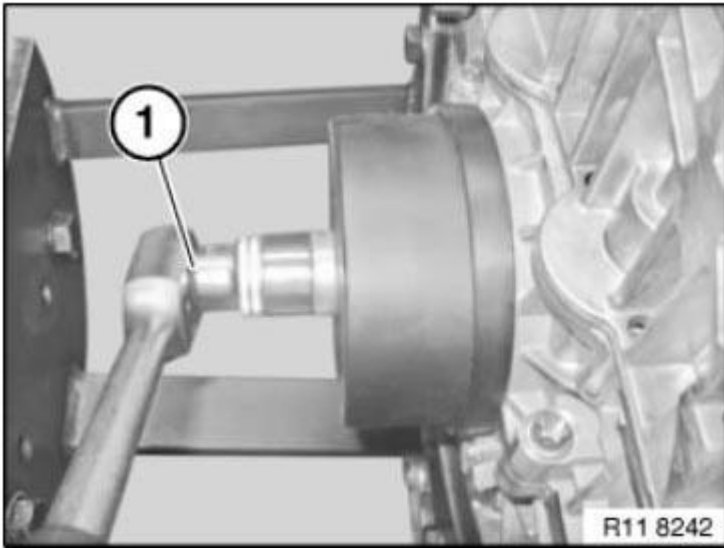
Installing Radial Shaft Seal Using Special Tool 119 183
